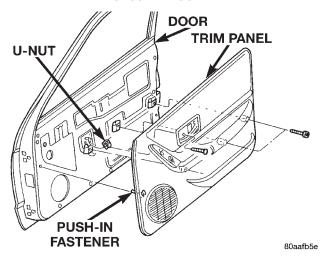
Front Door Trim Panel Remove/Install - Power Window
